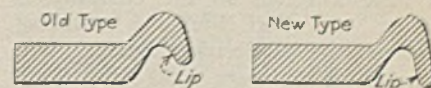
Old and New Construction, Locomotive Brake Shoes
